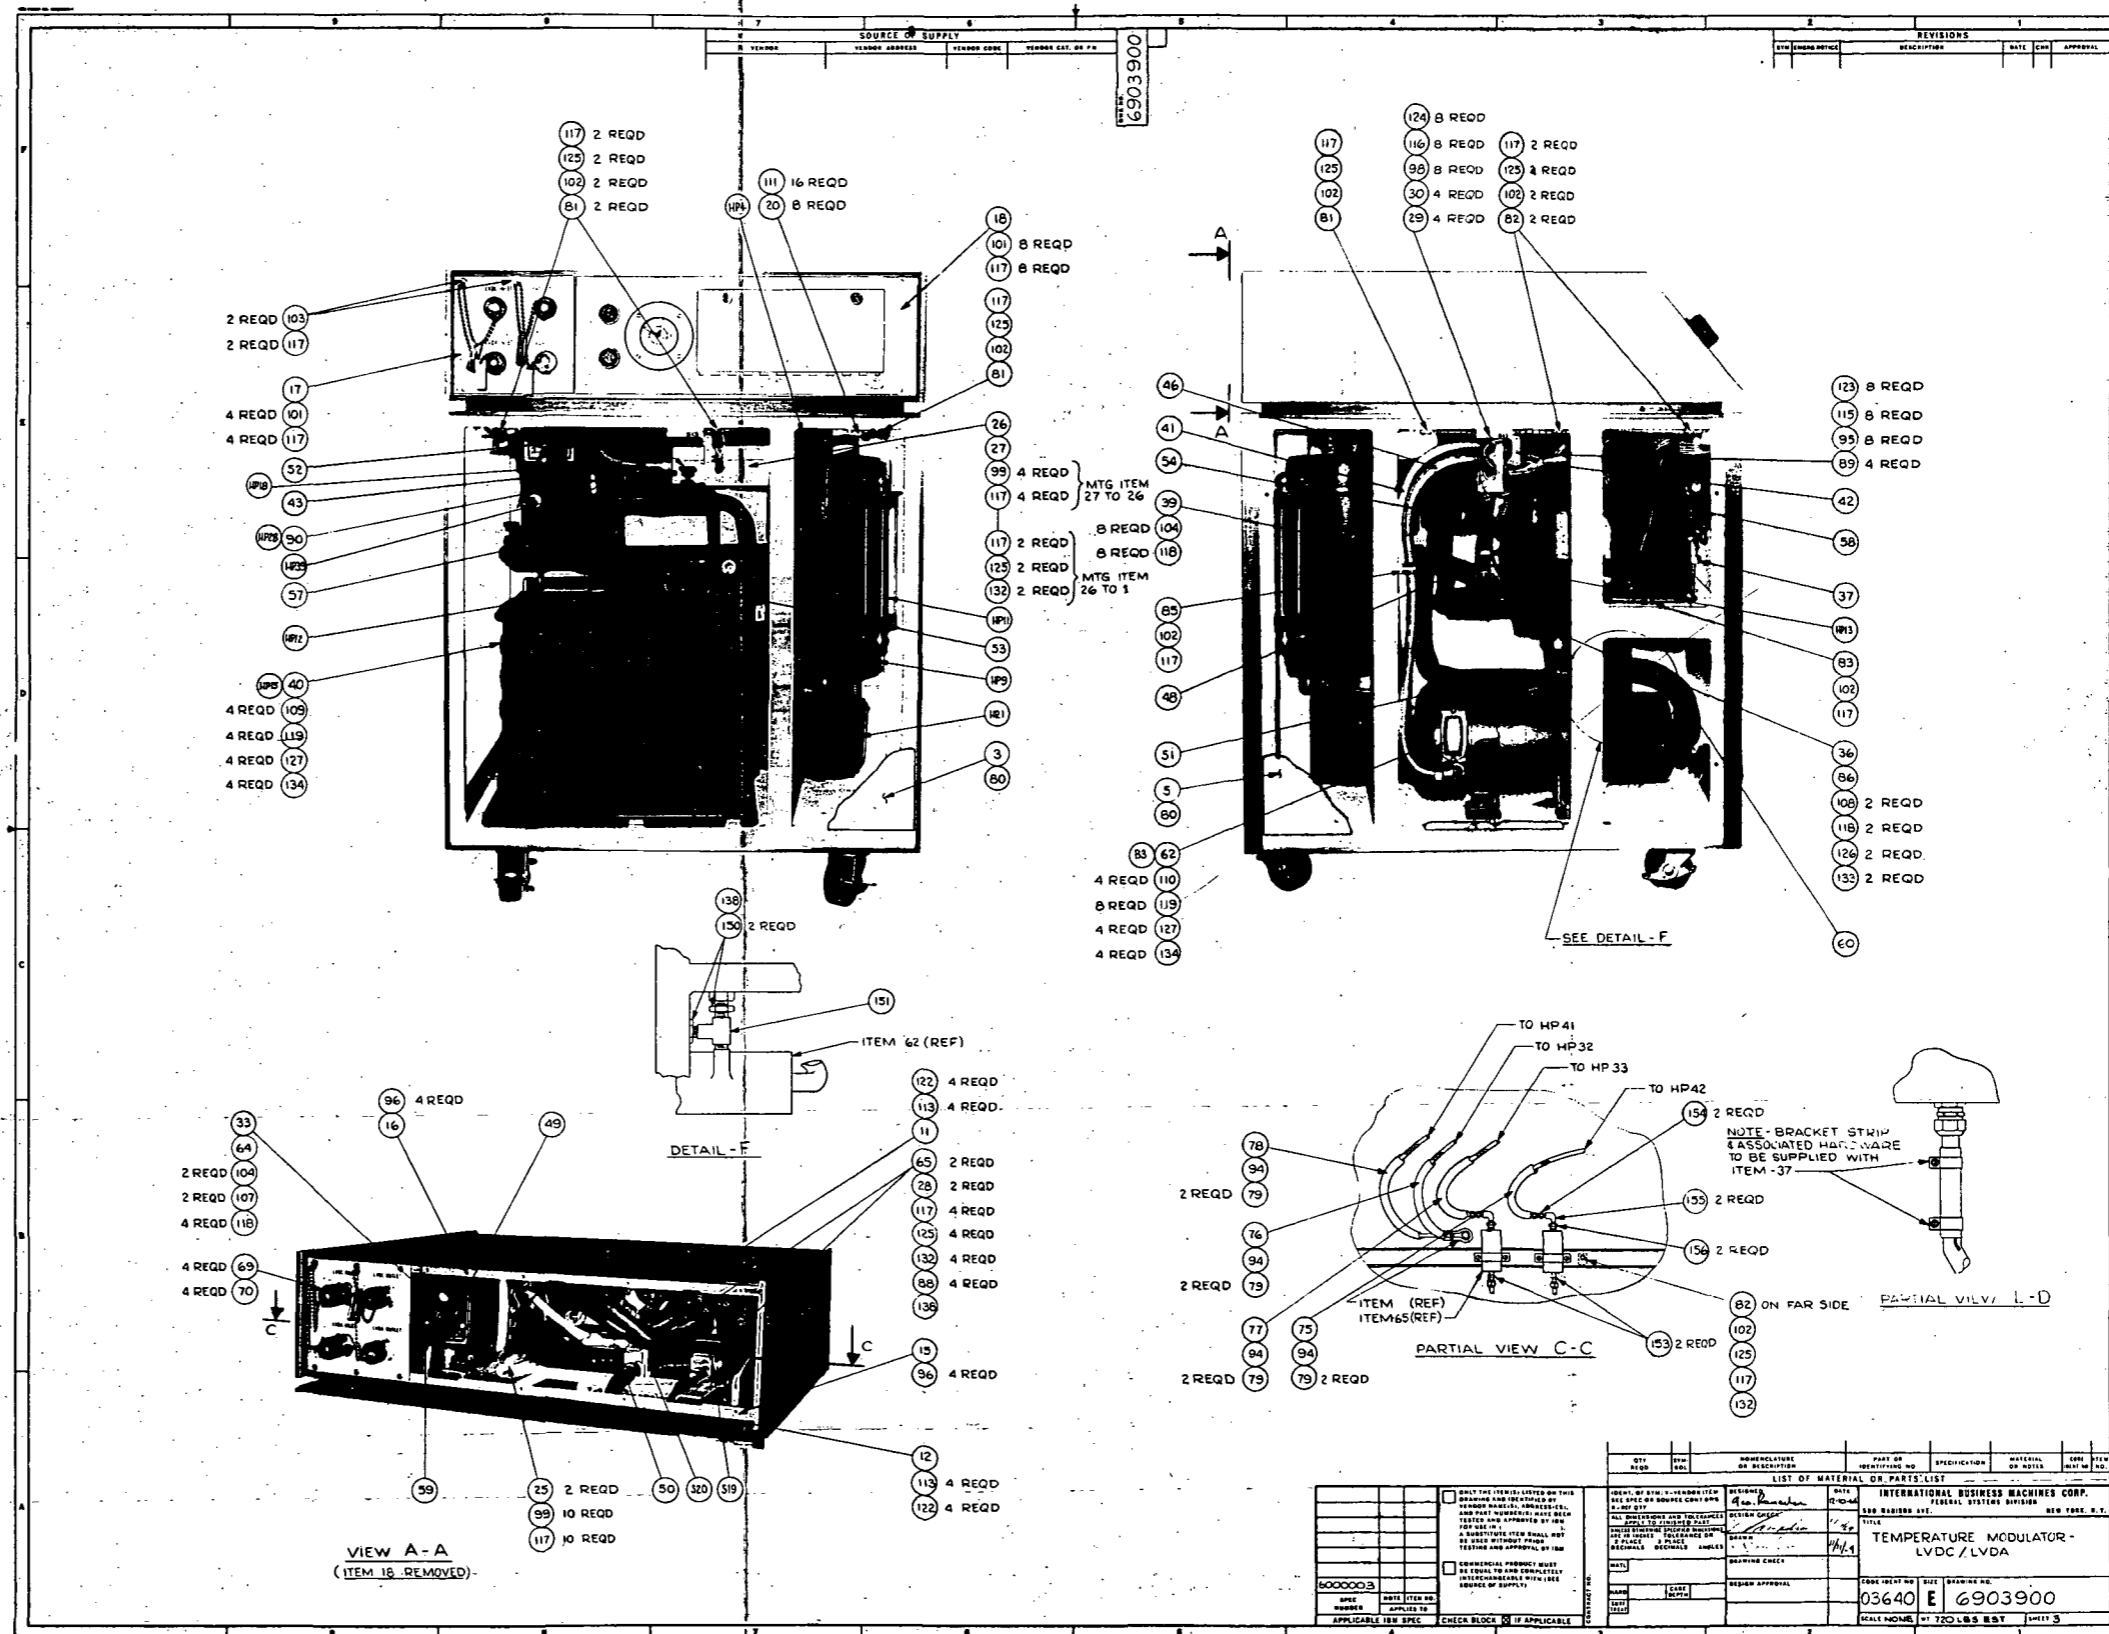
Temperature Modulator 6903900 Assembly Drawing (Sheet 2)
